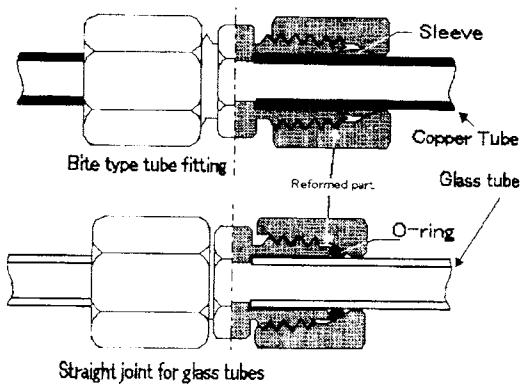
Straight joint for connecting glass tubes (lower) reformed and made of bite type fittings for hydraulic use (upper).
